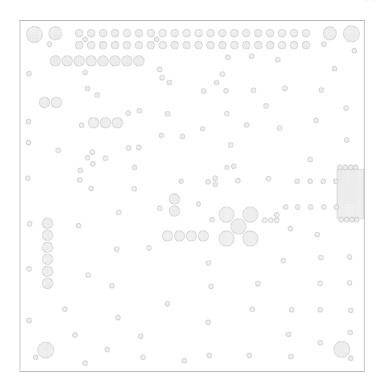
Infineon Evaluation Board V1.1, bottom side solder mask
